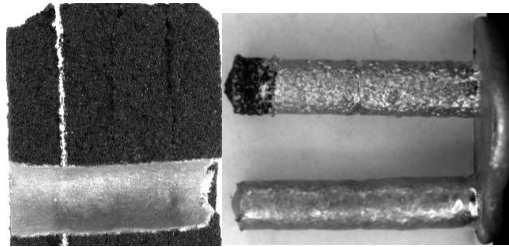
Coated and uncoated mold cross-sections shown on the left and metal casting obtained from corresponding surfaces is shown on the right.
